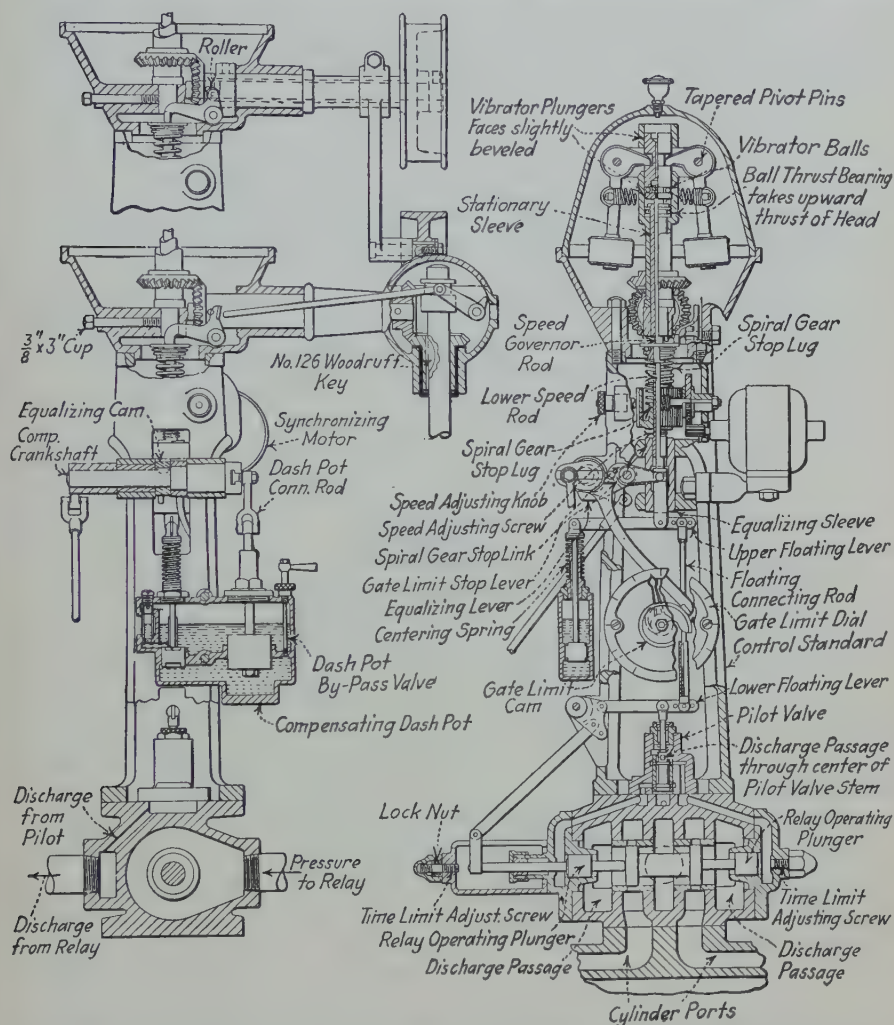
Control column and relay valve for oil-pressure governors—sectional detail—Woodward Governor Company.
